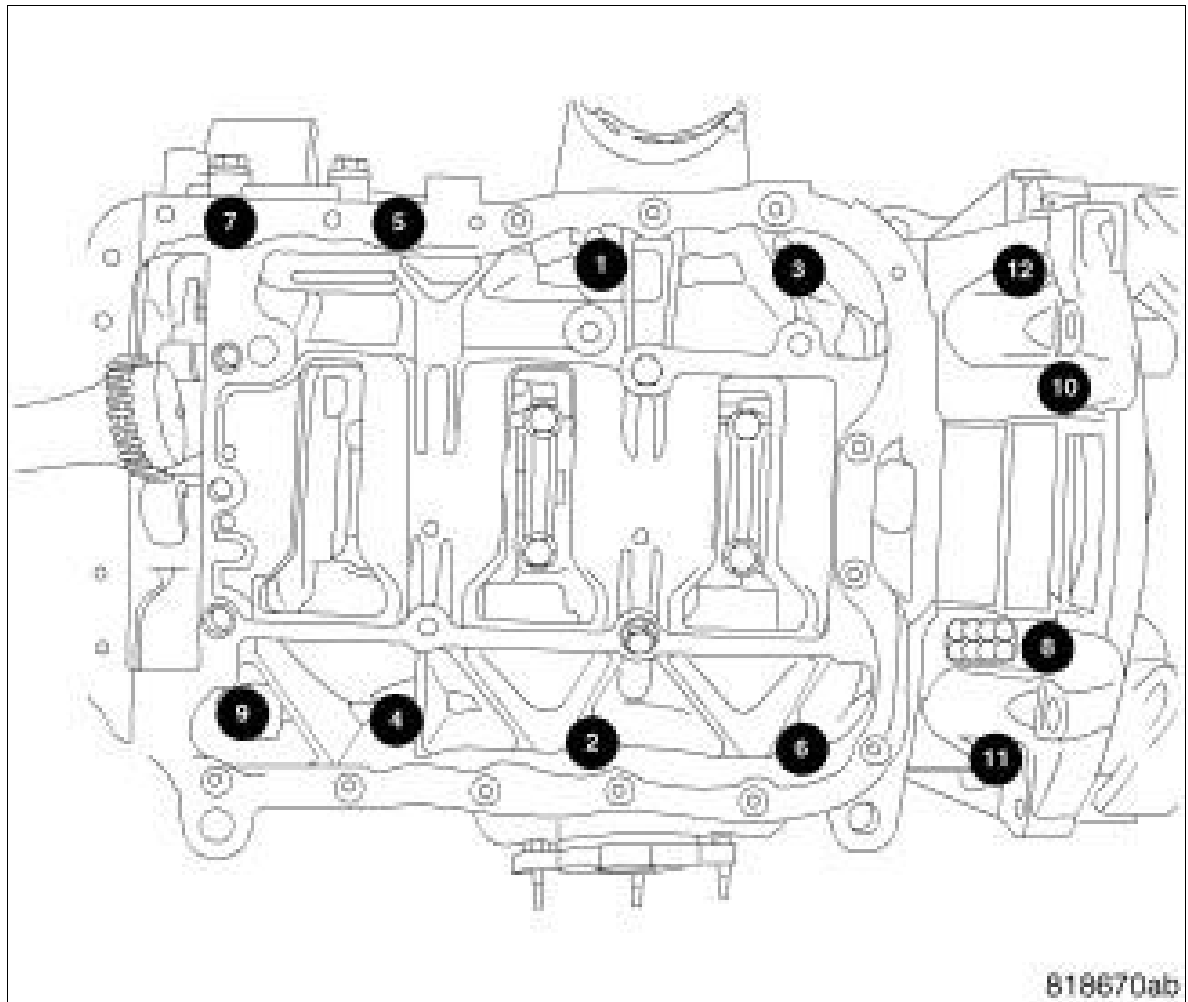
Intermediate Shaft Bearing Housing & Bolts
